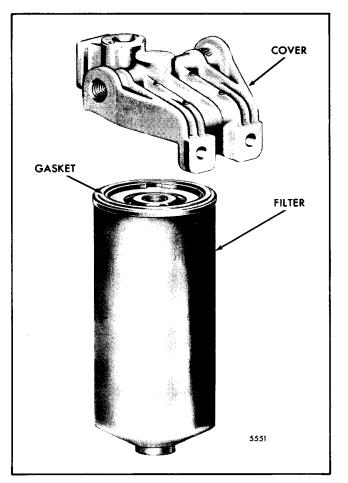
Spin-On Filter Details and Relative Location of Parts
